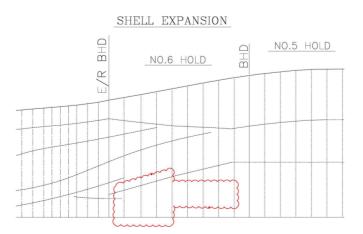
Buckling Reinforcement at Bottom Shell Plating forward of E/R BHD
